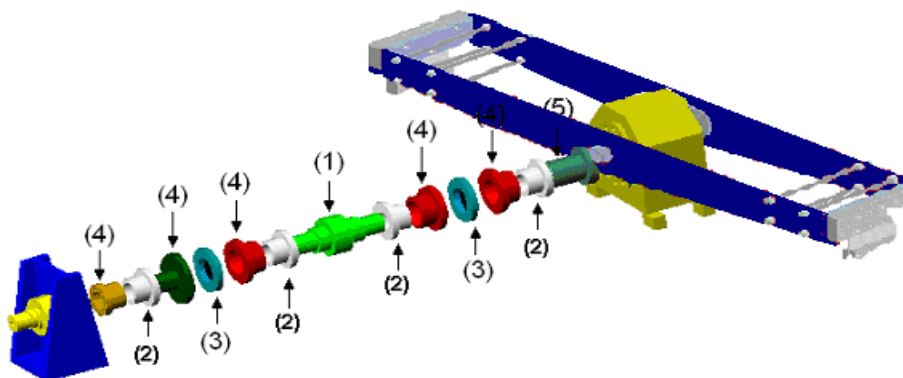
Primary method for torque measurement in the 1 kN·m hybrid torque standard machine.
